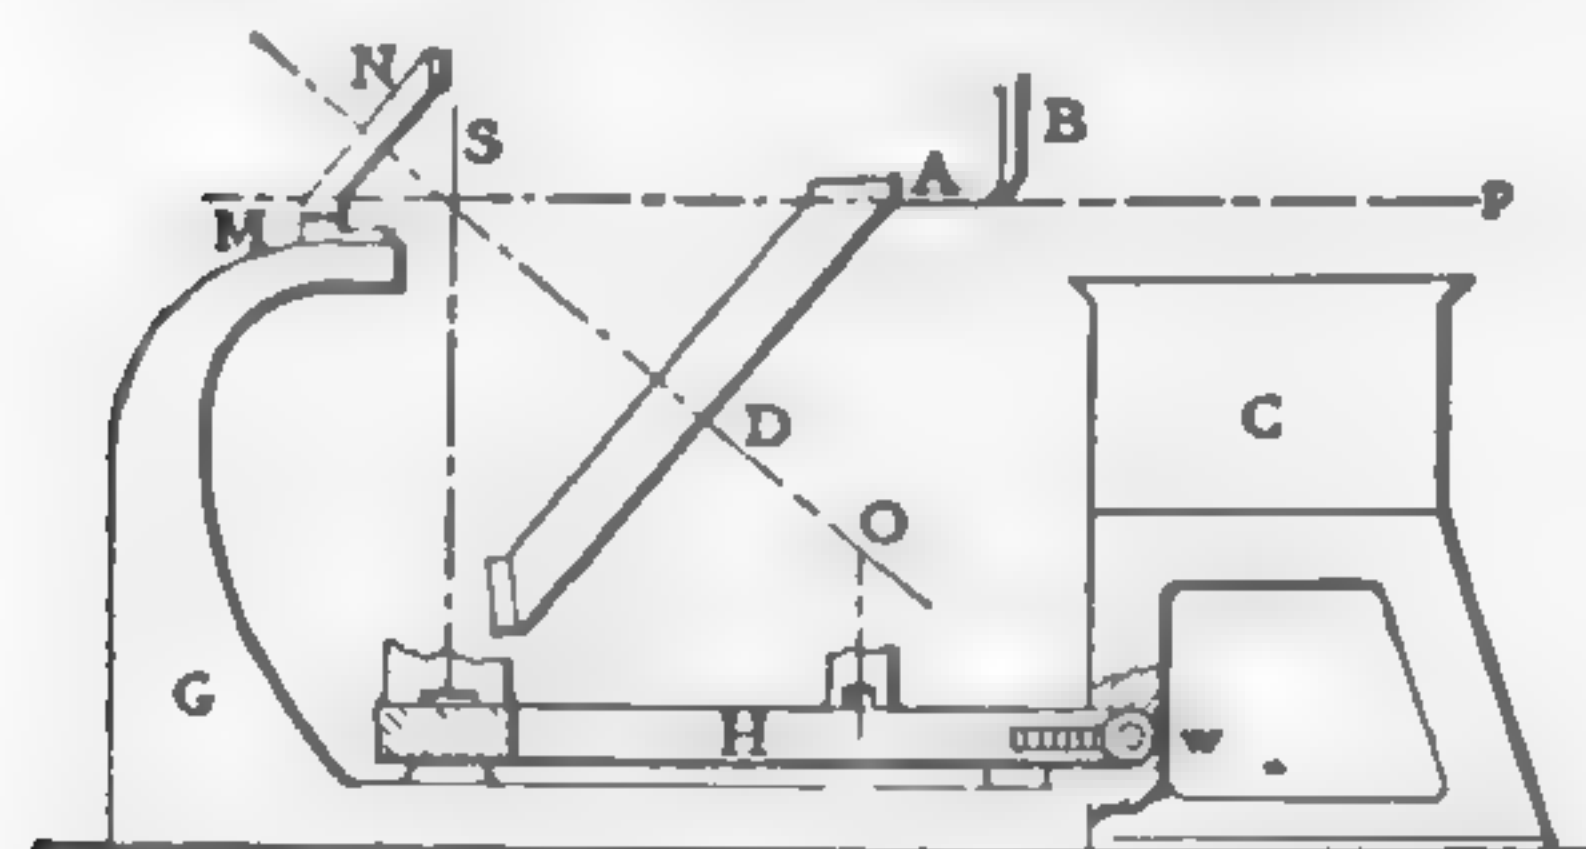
B. HAGEN-THORN'S INVOLUTE-TOOTH GENERATOR, 1872 (*American Machinist*)
